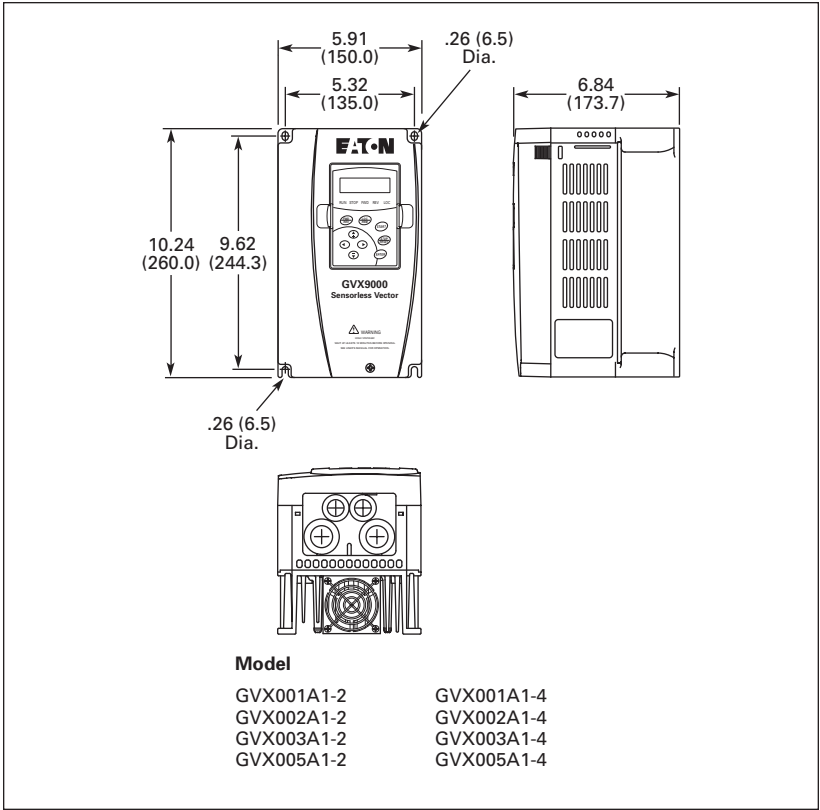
1 – 5 hp — Approximate Dimensions in Inches (mm)
